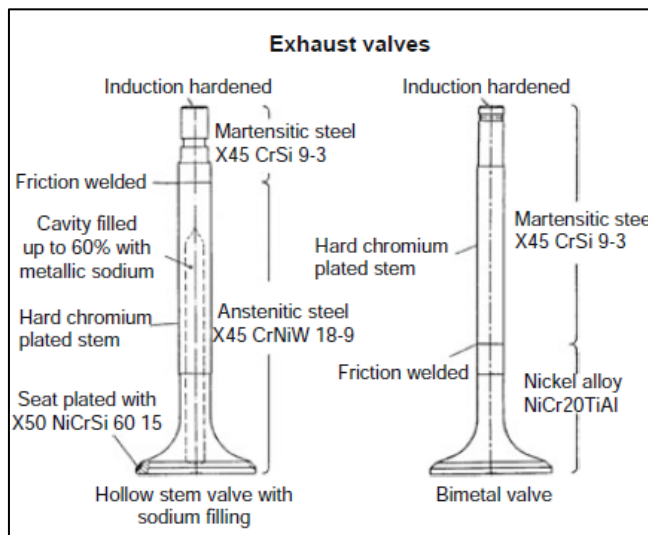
10 Exhaust Valve Material (Mollenhauer & Tschoeke, 2009)
